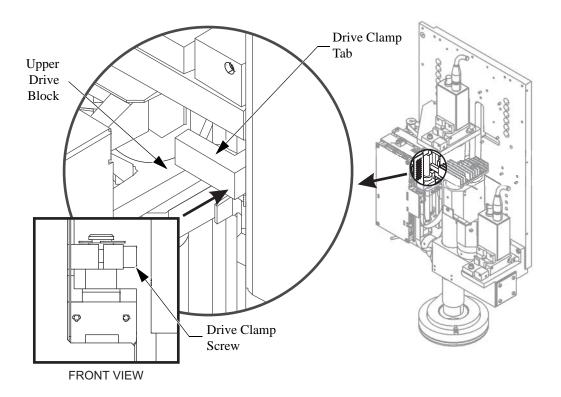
Upper Drive Block, Drive Clamp Tab, and Clamp Screw
